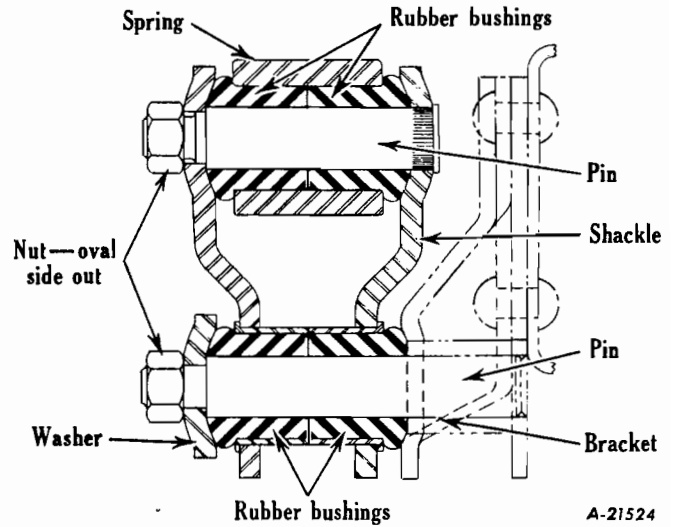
Rear Spring Rear Shackle For Models L-110, L-120, LM-120.
